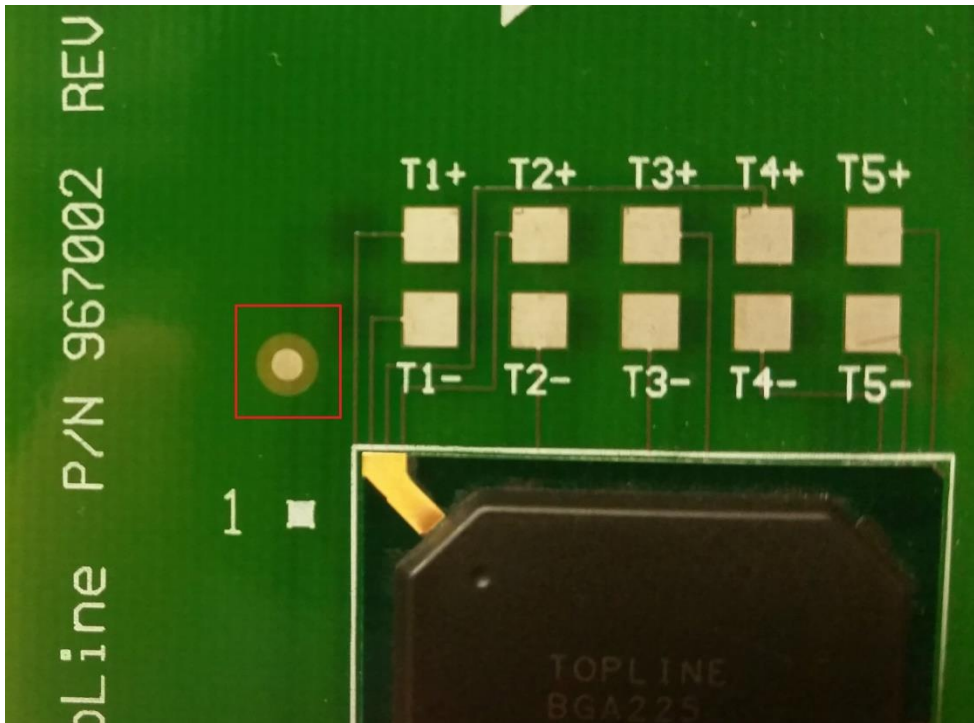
Photograph of a PCB with the fiducial mark indicated
